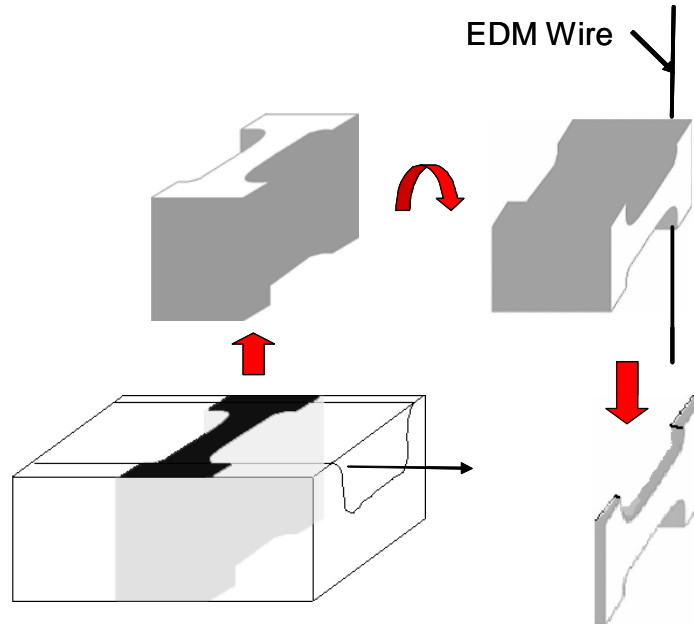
Representation of EDM Machining a Tensile Specimen from FSP Area.
